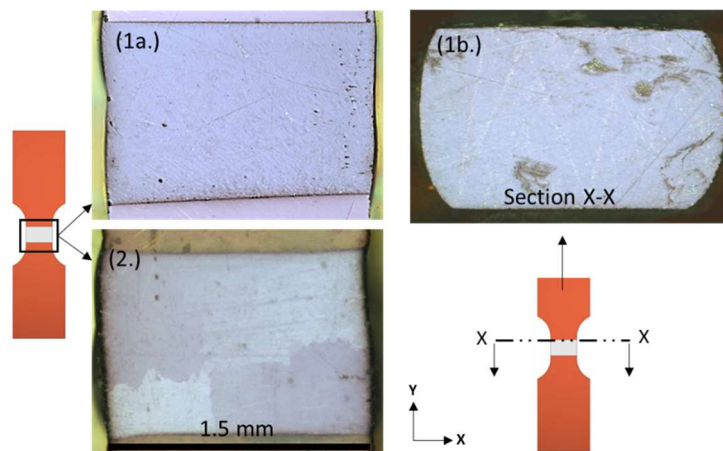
Cross-polarized images of SAC305 solder joint: 1a.) Single crystal specimen; 1b.) Sectional view of single crystal specimen; 2.) Multi-crystal specimen.
